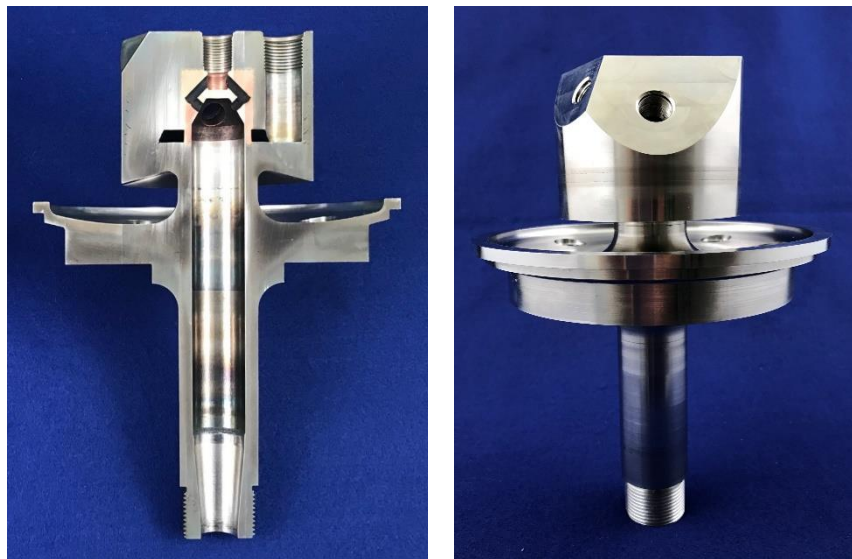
Bi-metallic prototype of the RS-25 ASI, built using hybrid manufacturing. (Left) A cross section of the first full build of the ASI with no fuel orifices. (Right) the final hot-fire version that included fuel orifices.
